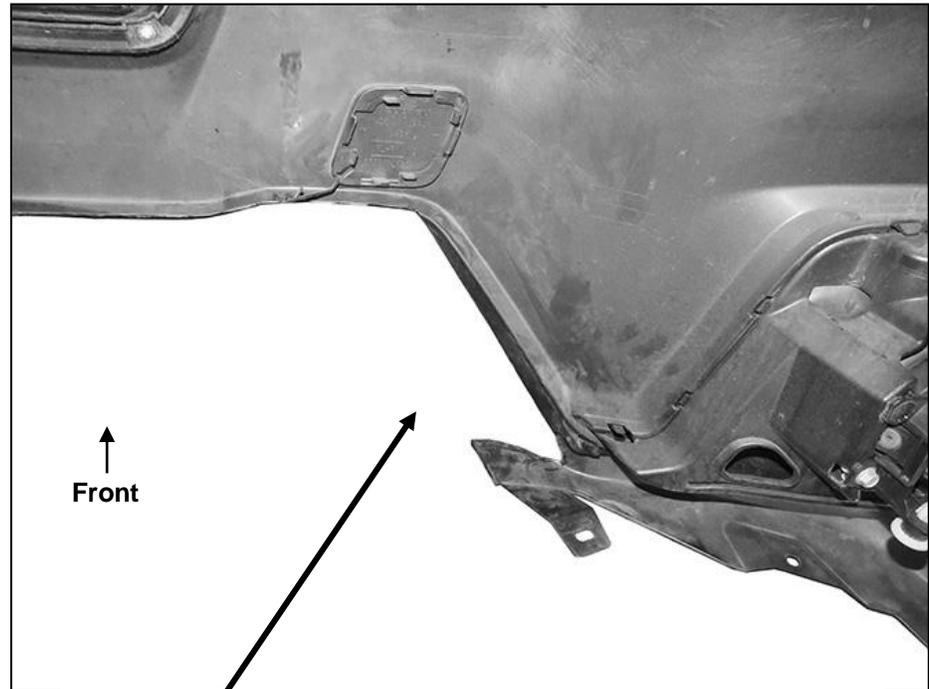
Use a marker or removable tape to make a cut line along trim line. Dashed line represents suggested final point for cutting, additional trimming may be required for a proper fit. Passenger/right side pictured, draw duplicate line on driver/left side of bumper cover
